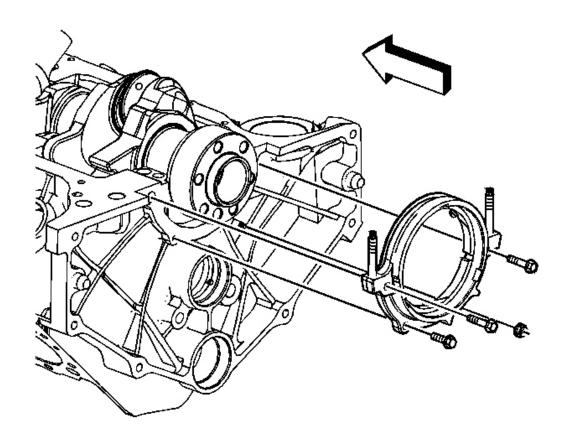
View Of Crankshaft Rear Oil Housing Courtesy of GENERAL MOTORS CORP.
